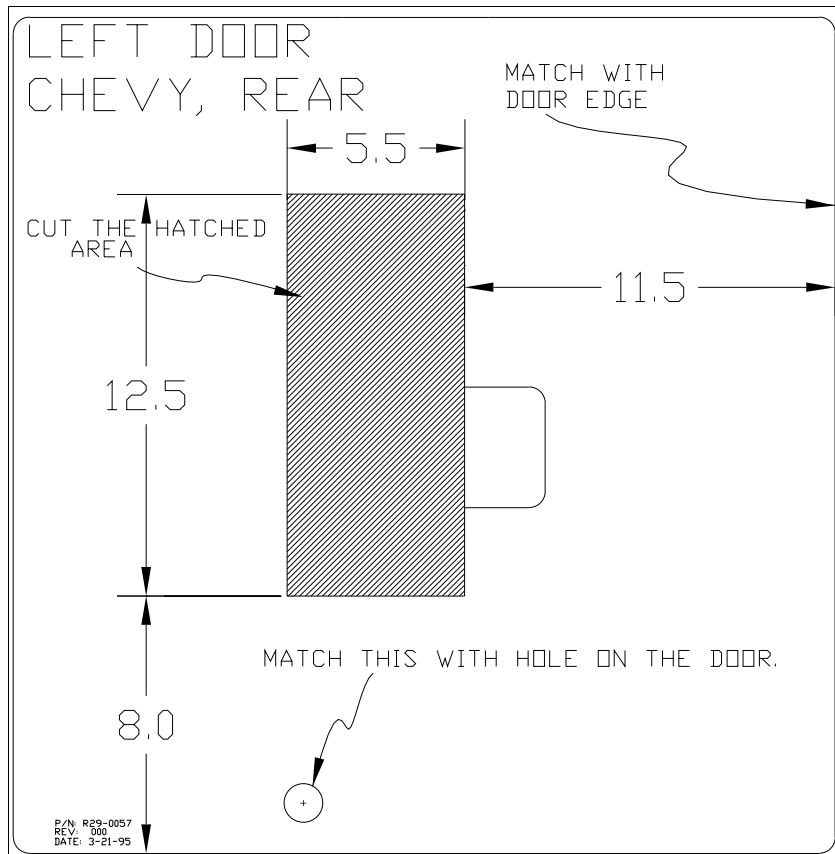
FIGURE [A]: CUTTING DIMENSIONS AND TEMPLATE
